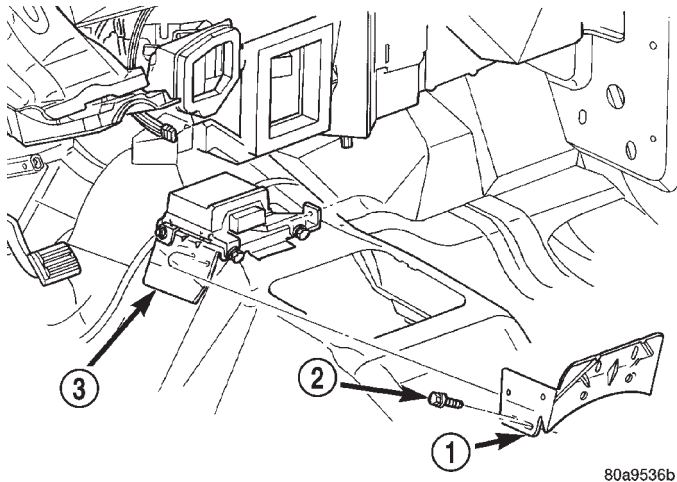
Instrument Panel Center Support Bracket Remove/Install
